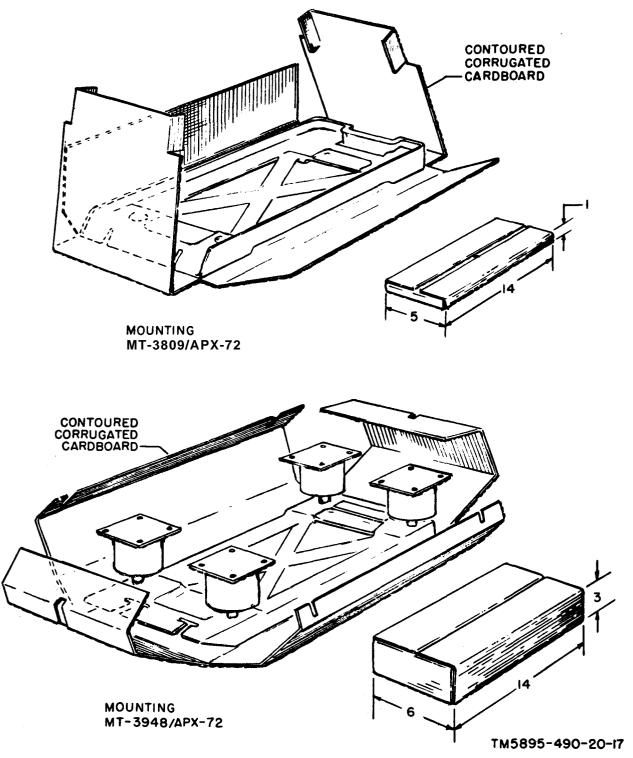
Typical packaging Mountings MT-3809/APX-72 and MT-3948/APX-72.
